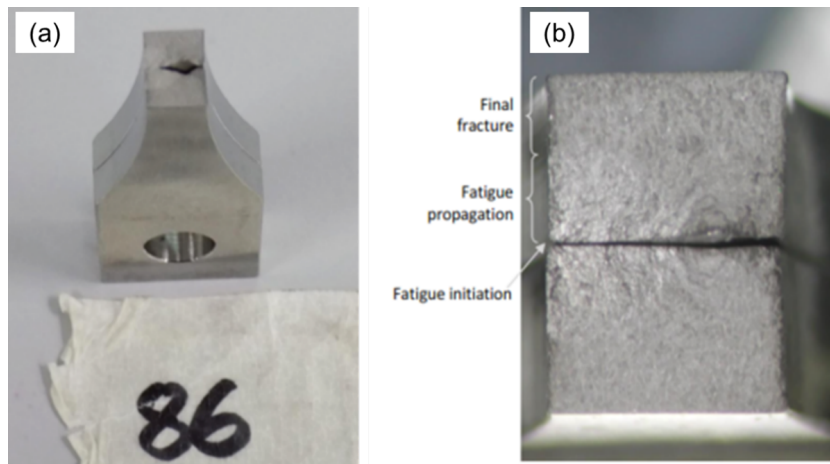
Picture of (a) fractured pristine AM specimen and (b) closeup photograph of fractured surface
